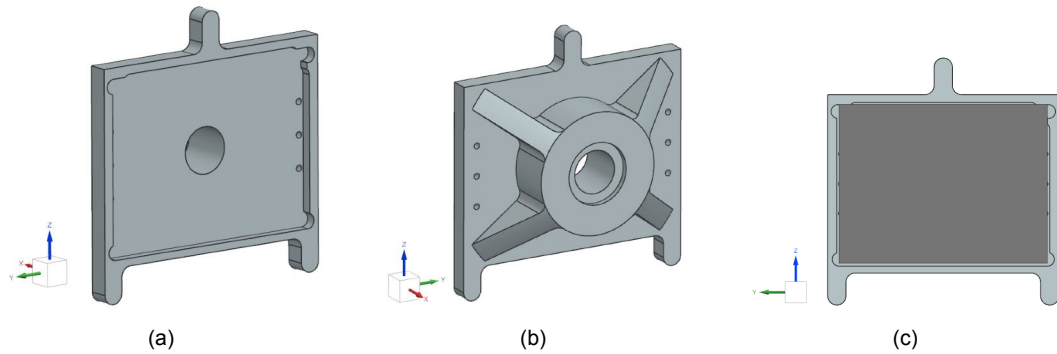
Design of the target plate housing: (a) oblique view of the front side, (b) oblique view of the back side, (c) front view of the front side, with target plate inside.
